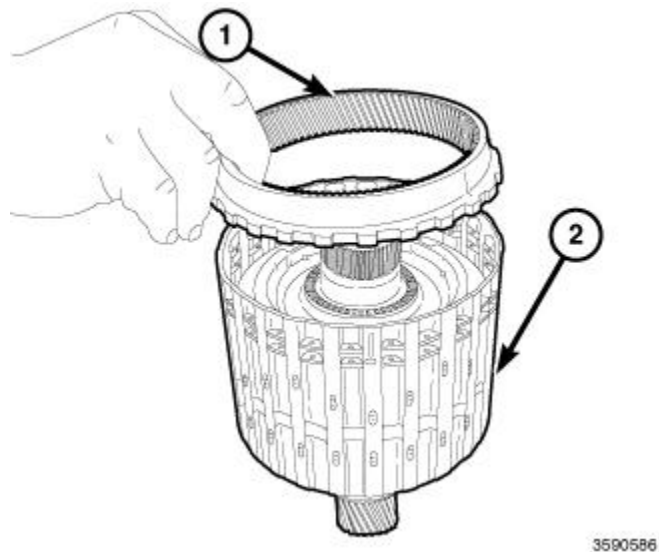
P3 Annulus & P4 Sun Gear/C/E Clutch Retainer
